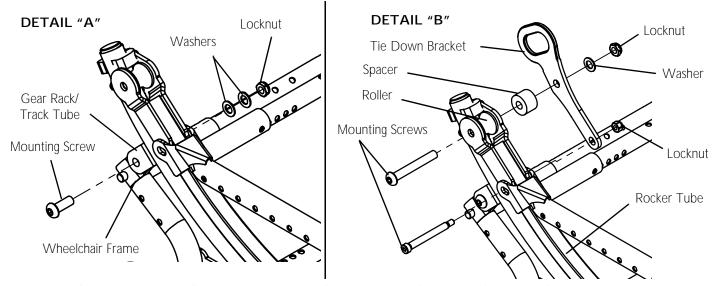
Install New Transport Brackets - 15-19 Inch Deep and 18-22 Inch Deep Seat Frames
